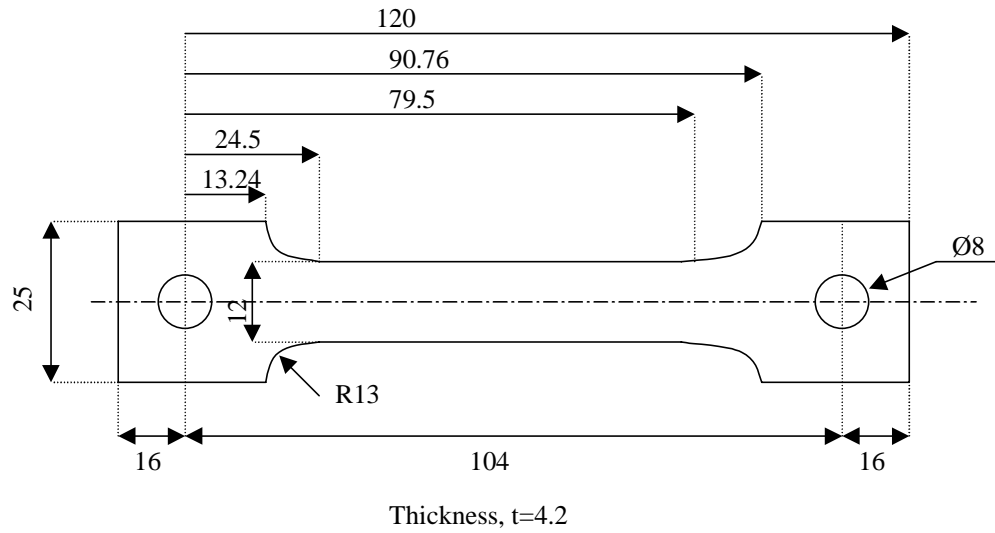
Geometry of tensile specimen used for testing of welded profiles.
